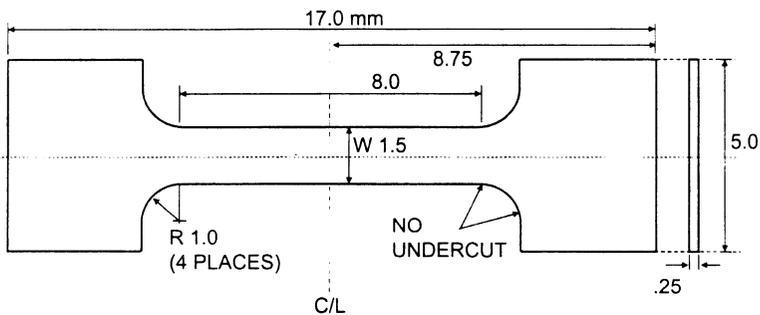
Dimensions of the miniature tension specimen. (Unit in mm)
